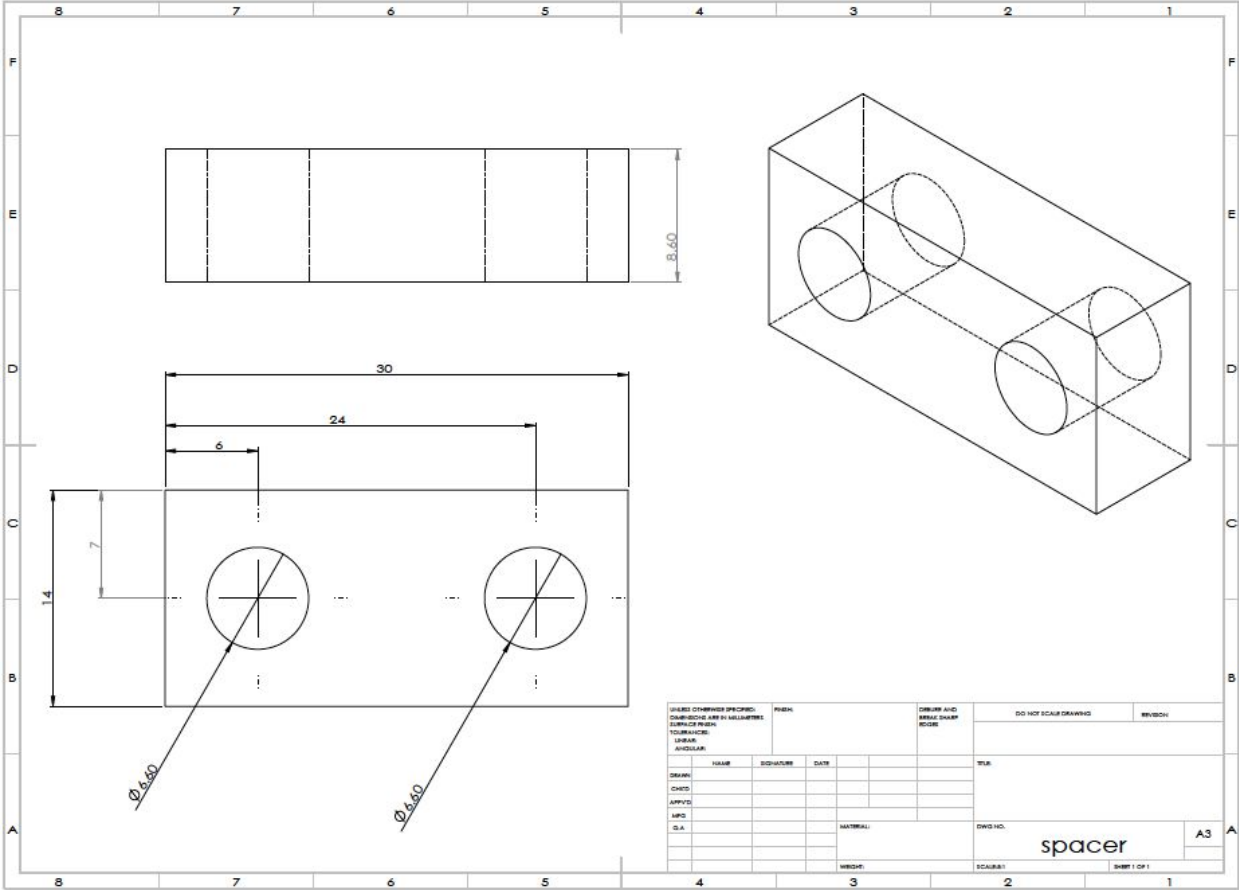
Engineering drawing: spacer for hydraulic pushing
